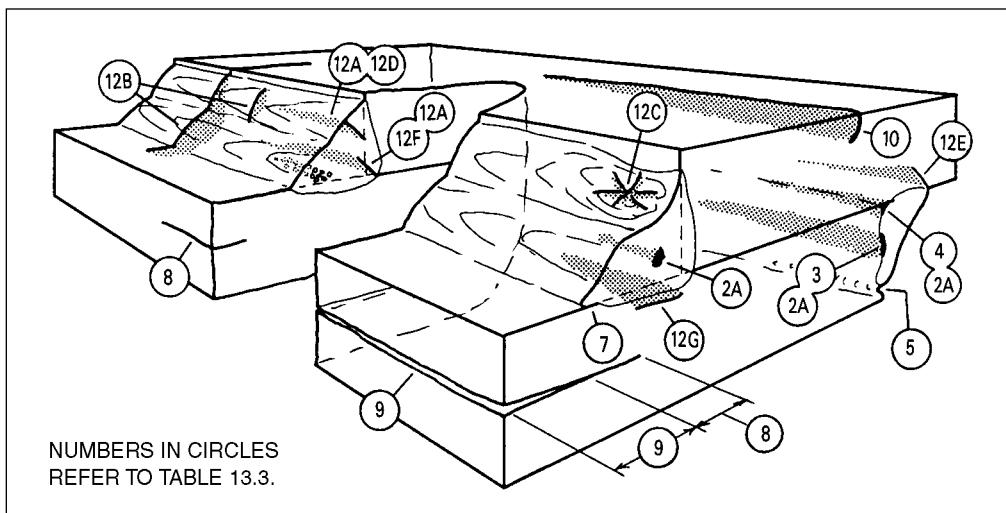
Discontinuities in a Single-Bevel-Groove Weld in a Butt Joint
